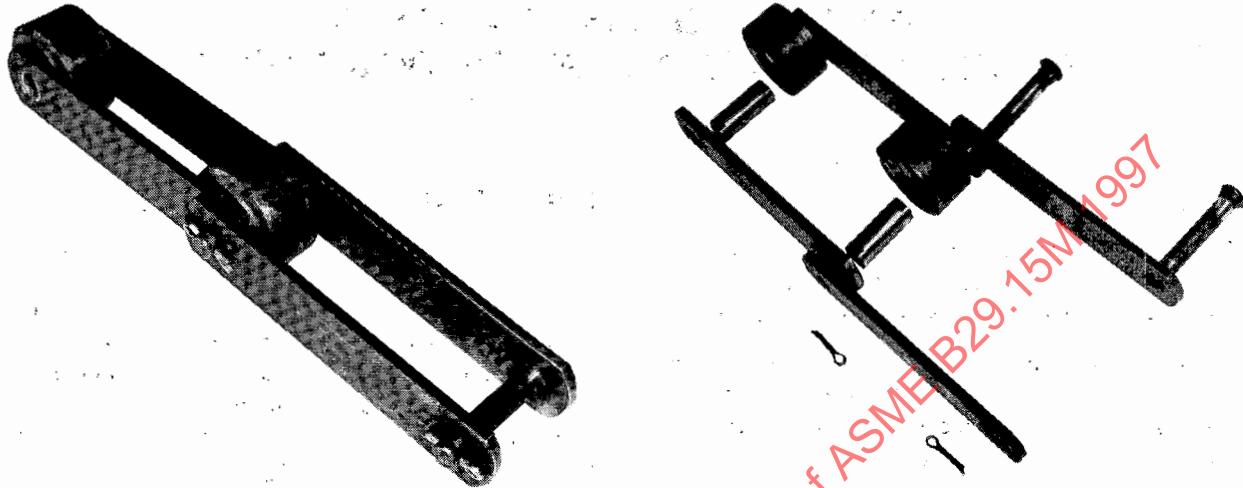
STEEL ROLLER TYPE CONVEYOR CHAINS
